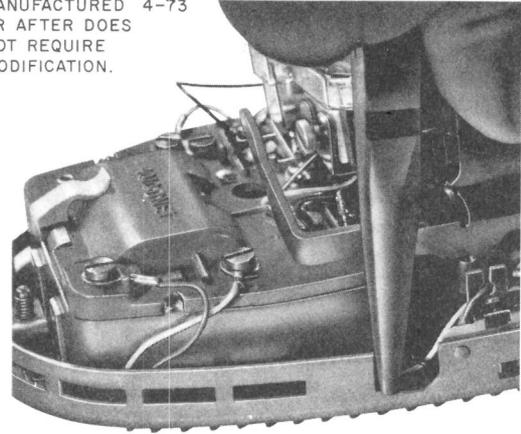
Modifying PRINCESS Telephone Set Base to Accommodate Mounting Cord Jack
